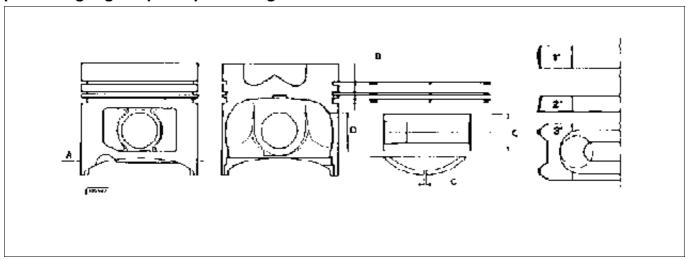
Piston, piston ring and gudgeon pin dimension.
